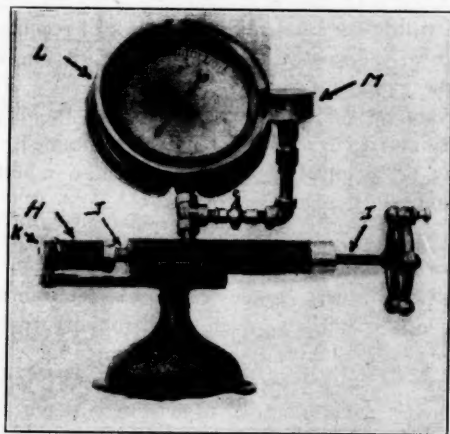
THE COMPRESSION TEST MACHINE WITH SAND TEST SPECIMEN IN TEST POSITION
